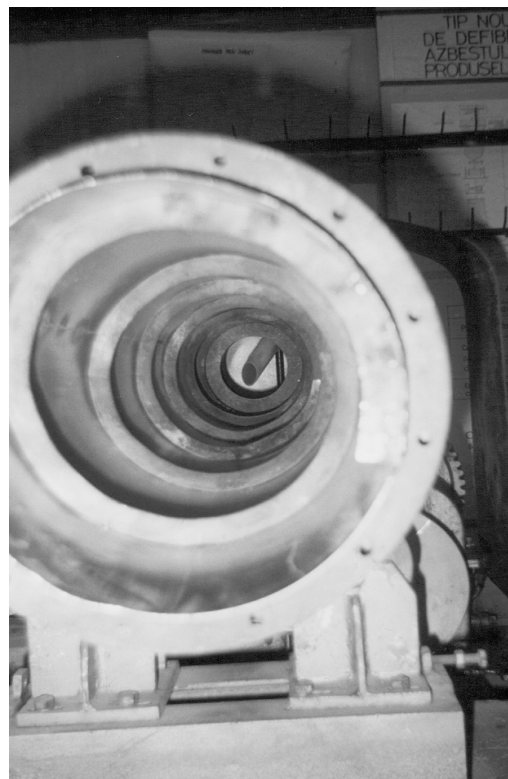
Inner fitting out made of helicoidally metallic tape installed on drum [6]
